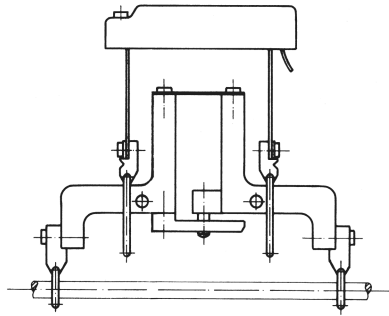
Axial extensometer EXA50-5, as example for the use of gauge length extension units. Basic extensometer EXA25-2,5.
